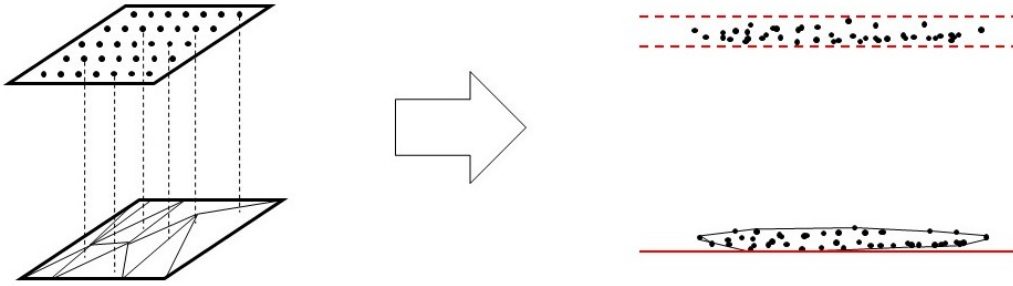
Extracting dimensional values to estimate tolerance of parallelism in 3D and 2D views.
